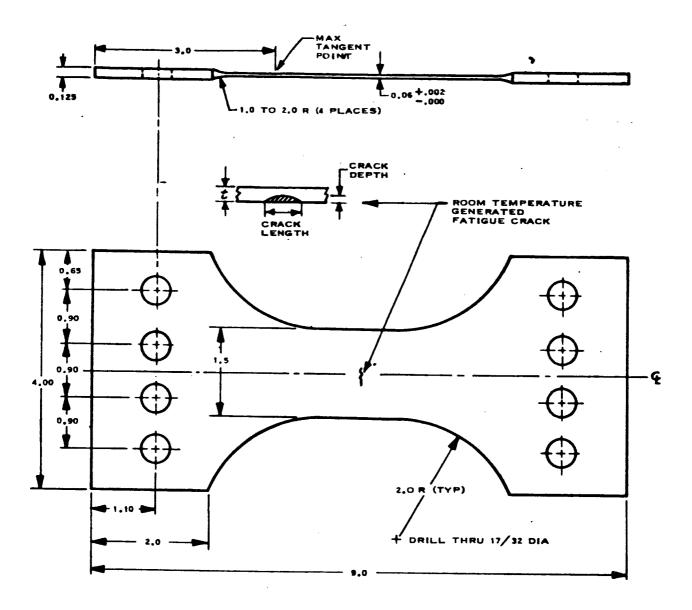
UNIAXIAL TENSILE TEST SPECIMEN
